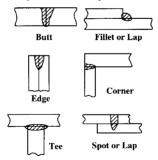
Examples of Laser Weld Joint Designs.
